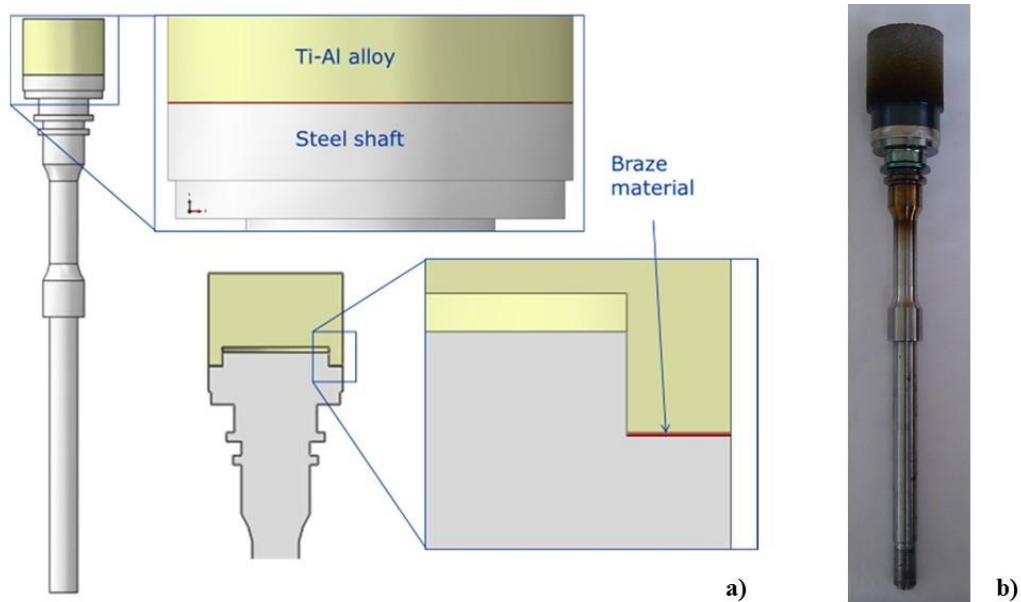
a) schematic representation of a brazed joint with junction details; b) TiAl cylinder/steel shaft brazed joint.
